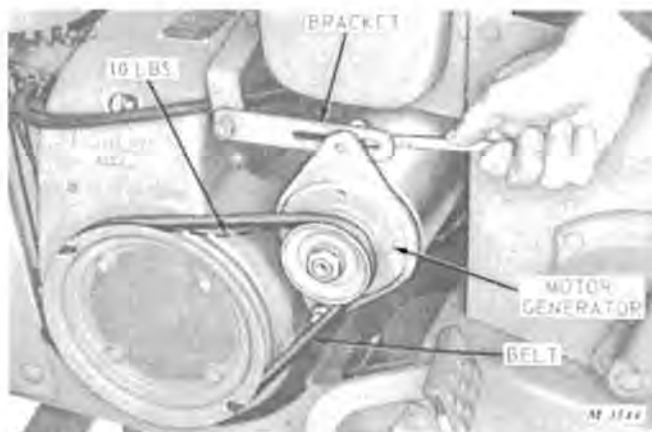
Adjusting Belt Tension on 110 Tractor
